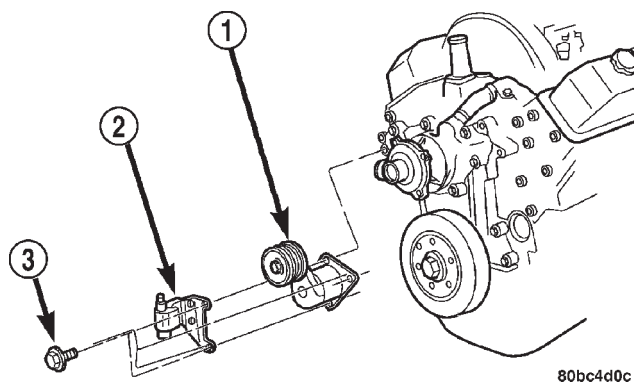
Automatic Belt Tensioner Removal/Installation 3.9L/5.9L Engines
